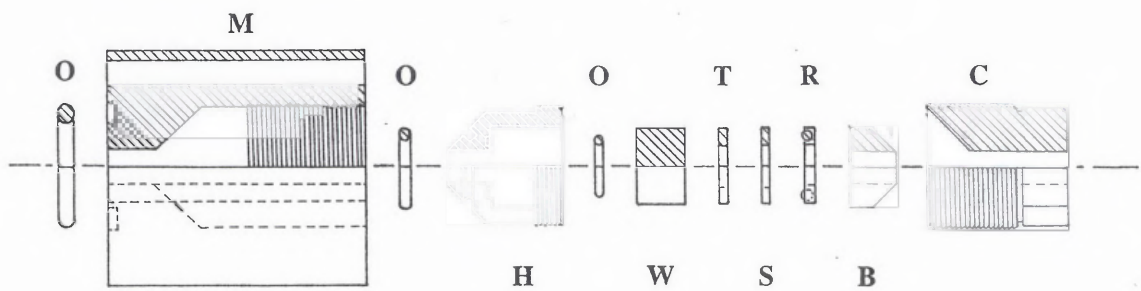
The window mount assembly (cross-sectional view partly shown).
